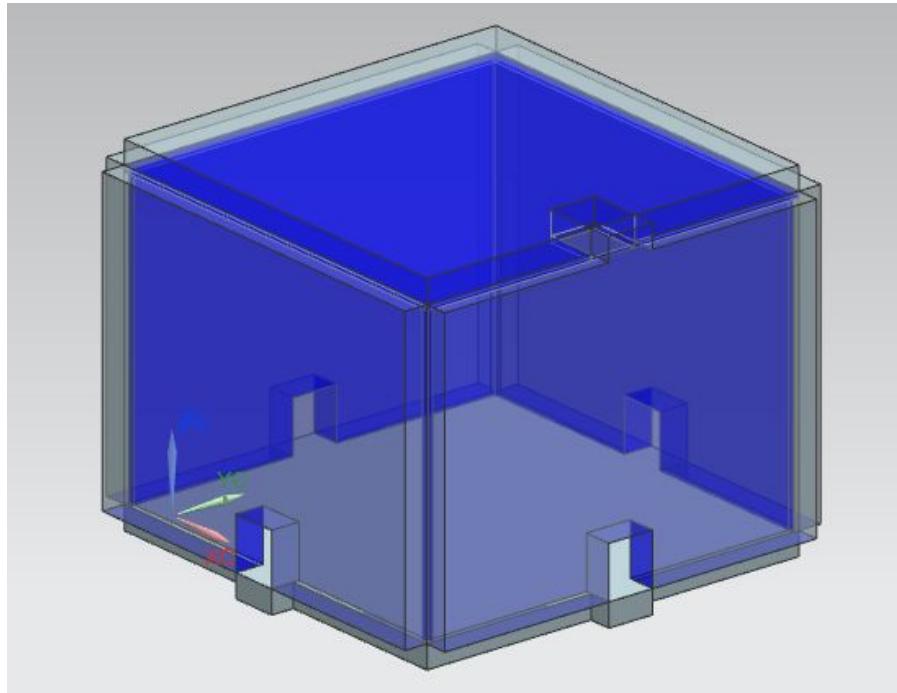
EDL Deployed Assembly Drawing, Trimetric View.
